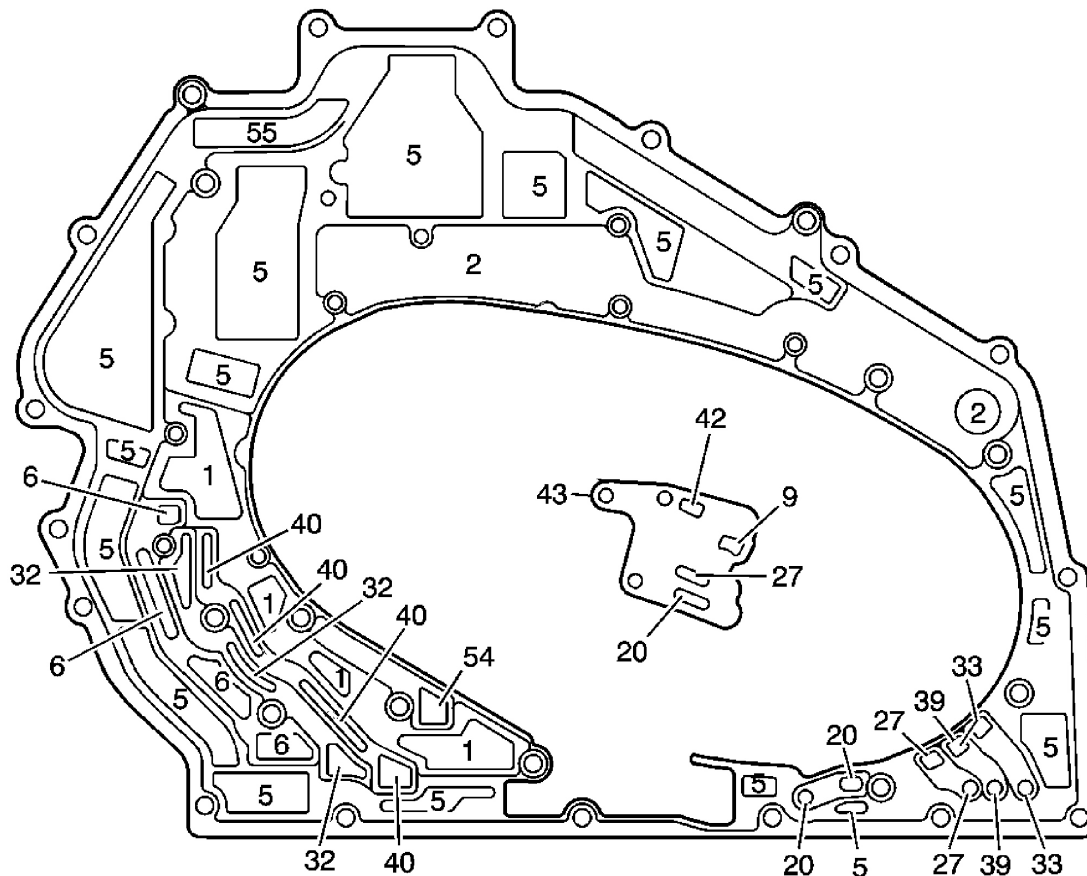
Seal Fluid Passages (Case Cover to Case and Driven Sprocket Support)
